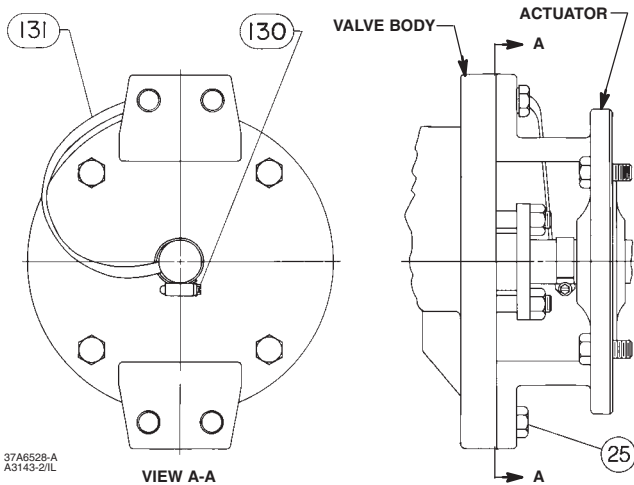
Optional Shaft-to-Valve Body Bonding Strap Assembly
